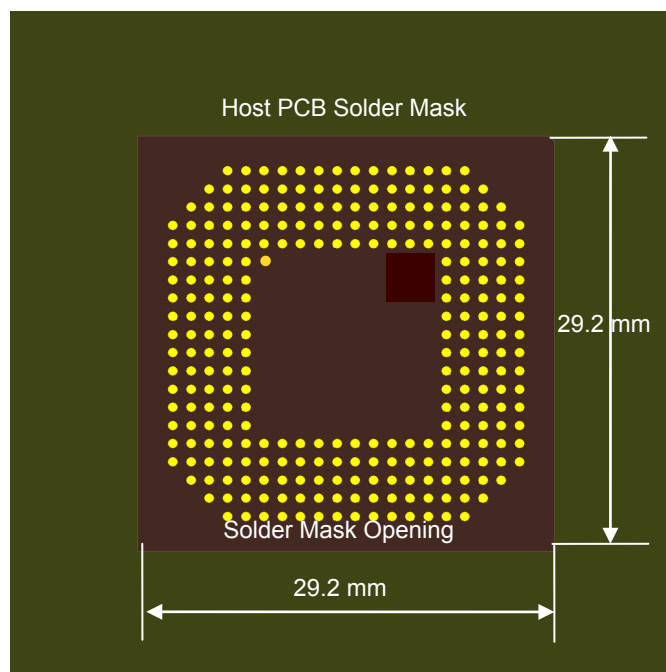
, $\varnothing 0.63$ mm solder lands with one large solder mask opening extending at least 50 μm outside the package outline on all four sides
